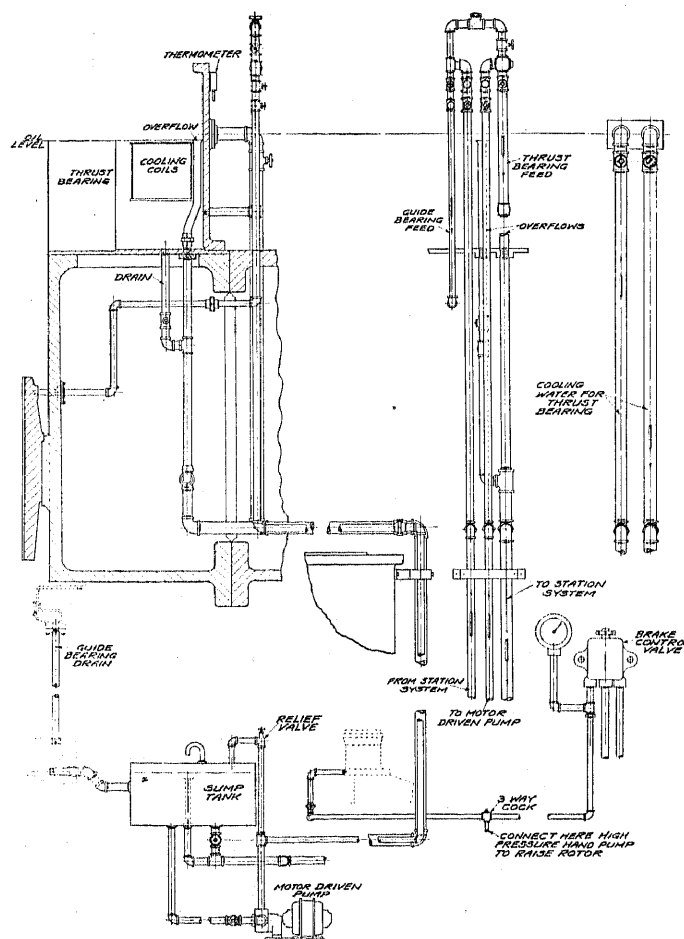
DIAGRAMMATIC PLAN OF PIPING
